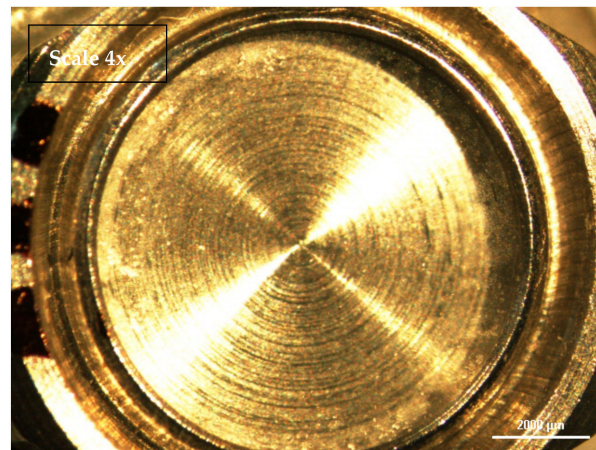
Lower JB on z axis before the test, AISI 316 spindle.
